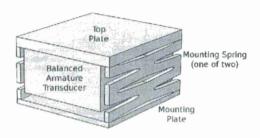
More realistic concept with the balanced armature transducer mounted from a top plate with the drive rod protruding from the bottom in the figure, and with compliant mounting springs on two or four sides to support the mass.
